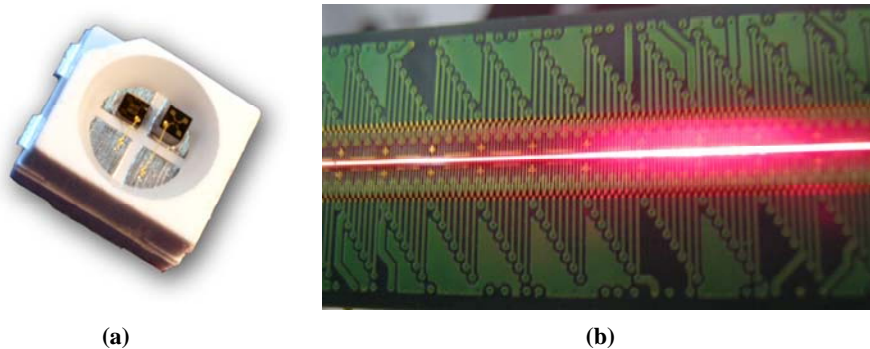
(a) A PLCC-4 package incorporating 2 VCSEL chips. The package dimensions are 2.8mm x 3.2mm. (b) Sixteen 1 x 32 VCSEL arrays implemented in a chip on board (COB) approach.
